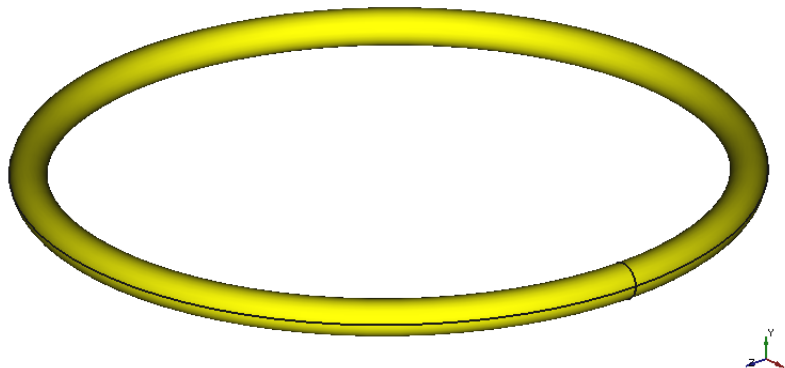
CAD drawing of the torus made in FreeCAD. Axis system can be found in the bottom right part of the picture
